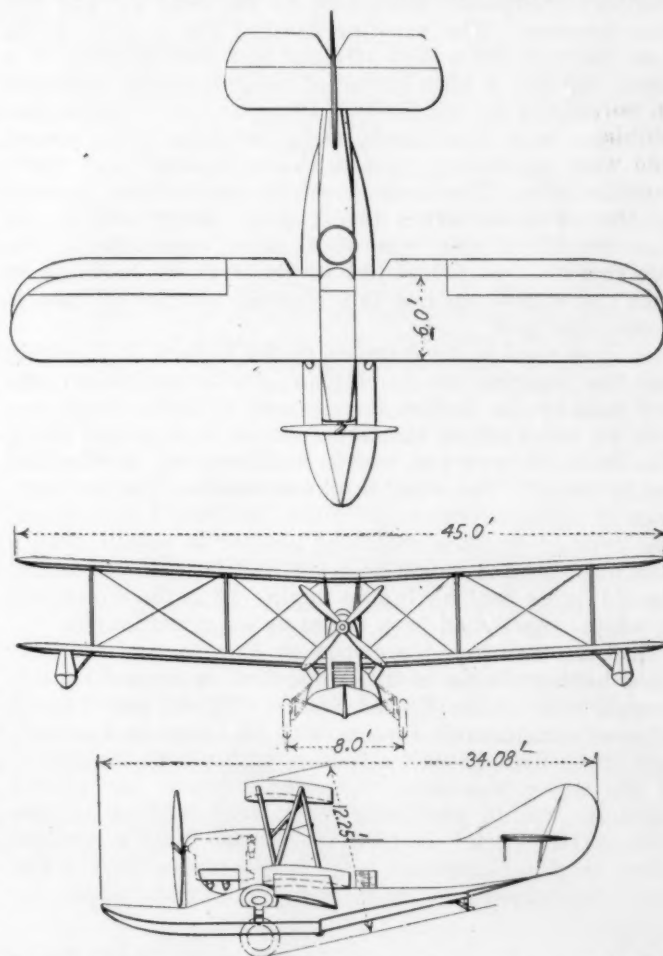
PLAN VIEW AND FRONT AND SIDE ELEVATIONS OF THE LOENING AMPHIBIAN
